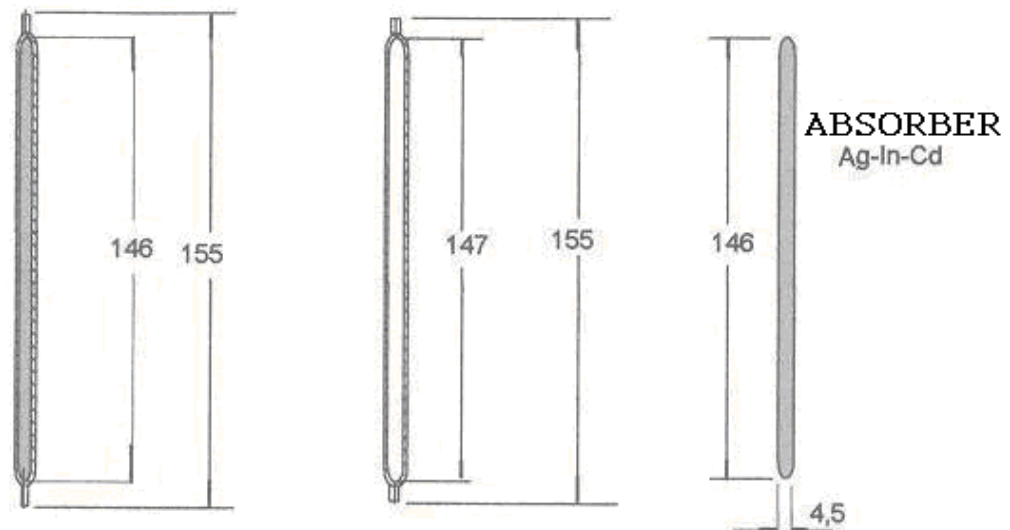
Dimension details of the Control/Safety element of the ZPC-MRR core (mm).
